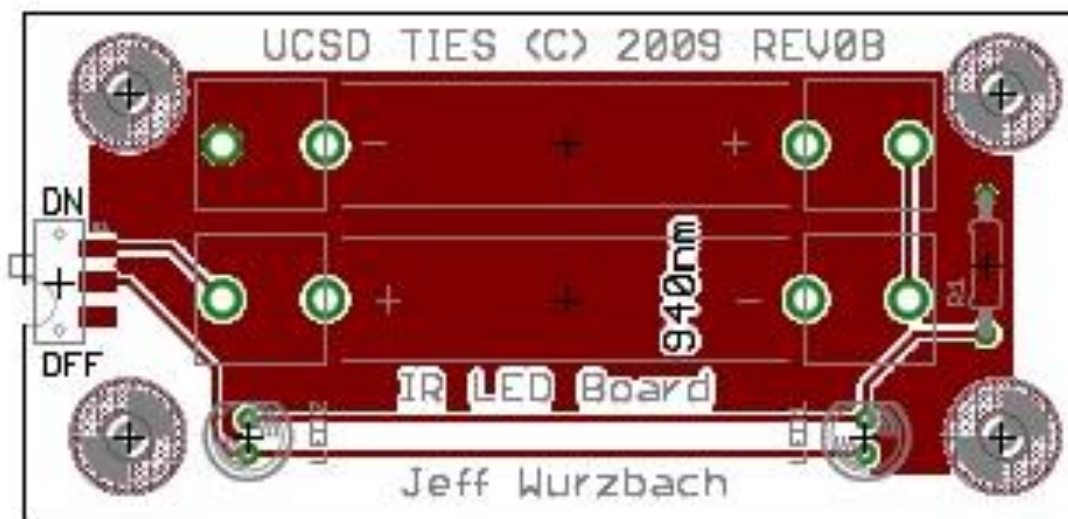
Purposed Block Zero B PCB layout of the IR LED board
